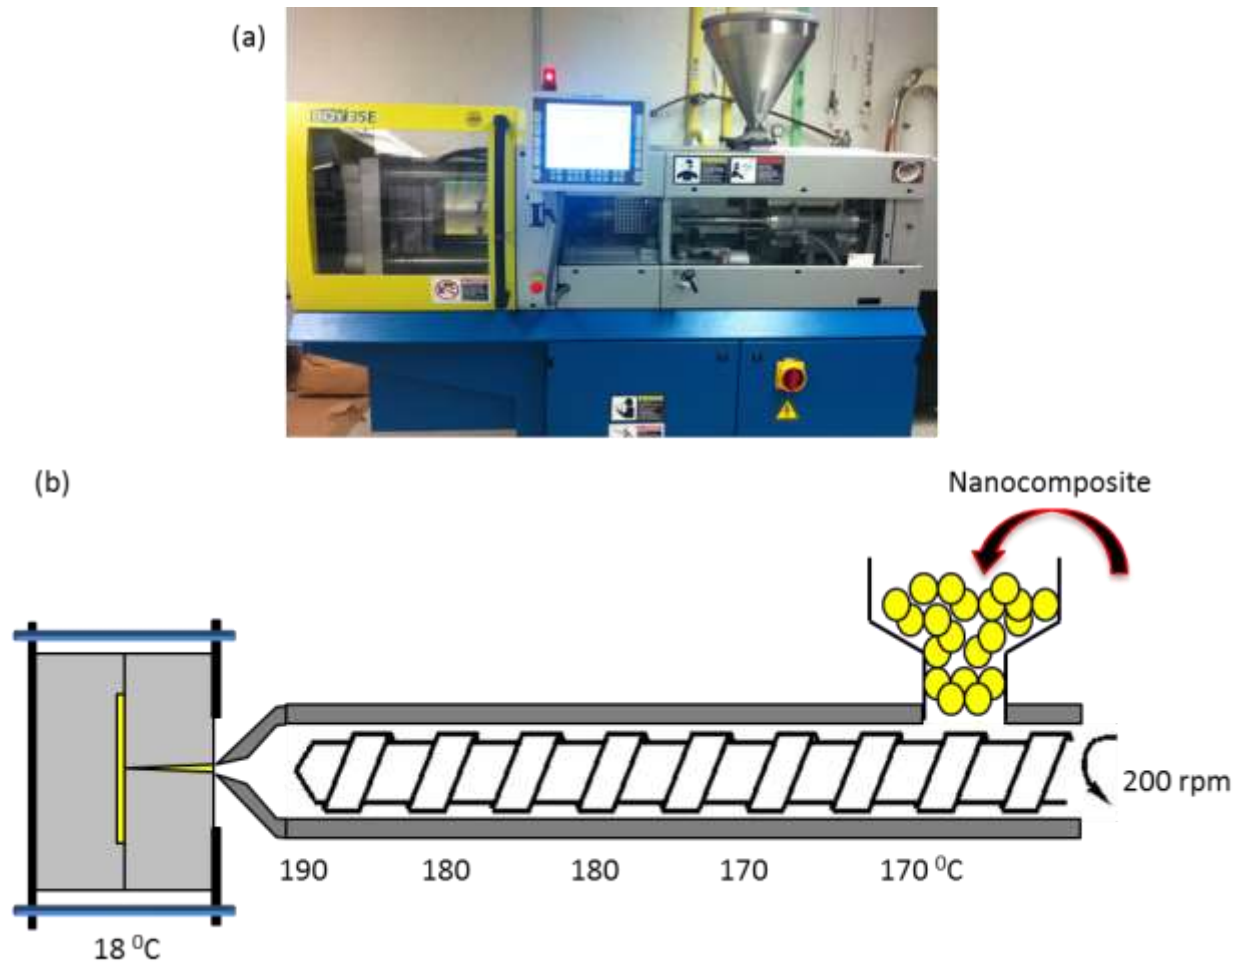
(a) injection molding machine (BOY 35E) (b) schematic of melt compounding and process conditions in injection molding, reproduced from (www.toolcraft.co.uk)
